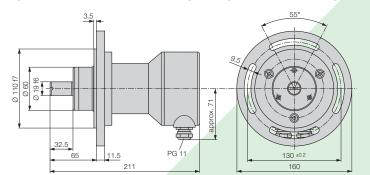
KINAX WT 707 with additional gear, screw terminals, cable glands and flange.
